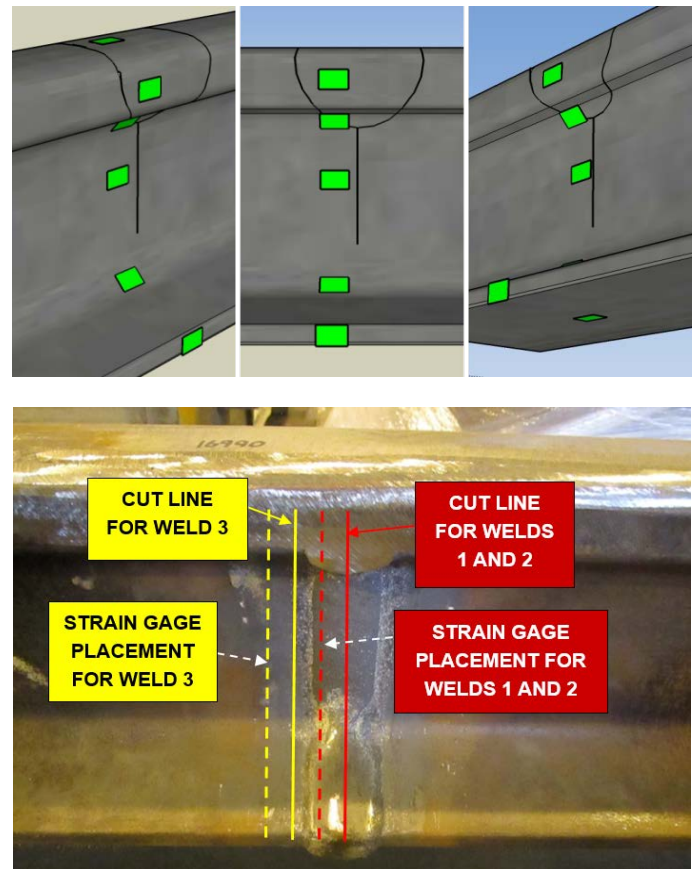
Strain gage locations and cutting locations for residual stress measurements.
